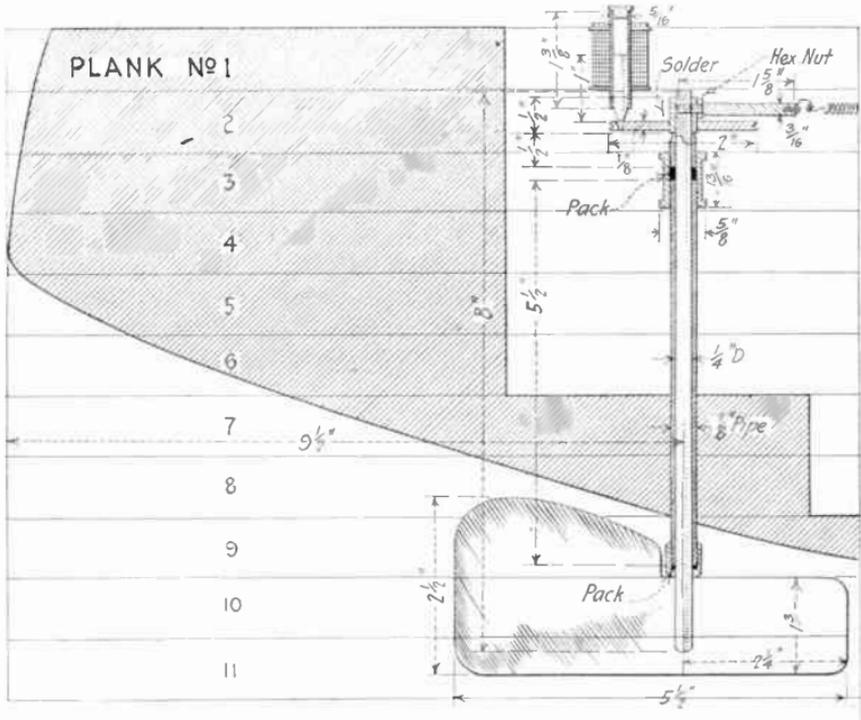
Cross section through stern showing rudder mechanism in detail.
